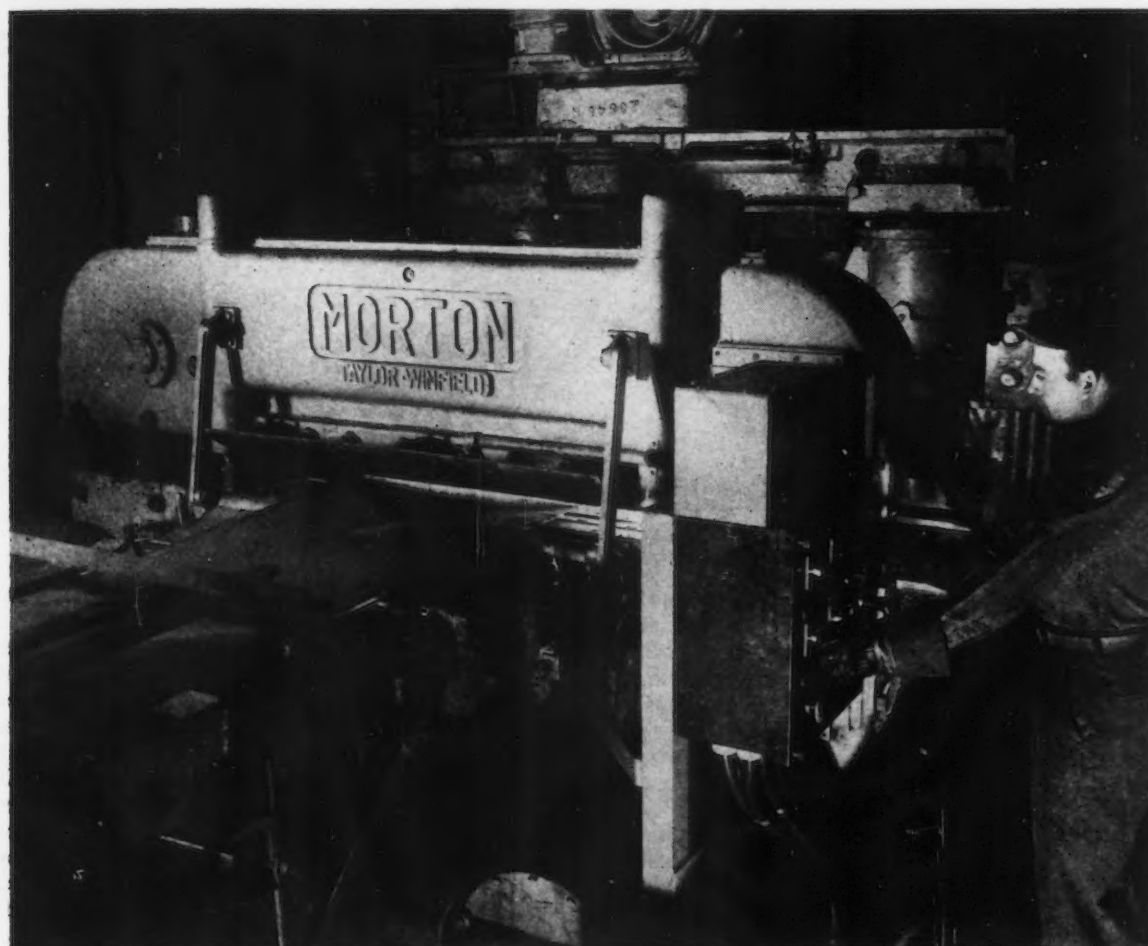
Trimmer for removing the flash caused by the upset of the weld.
